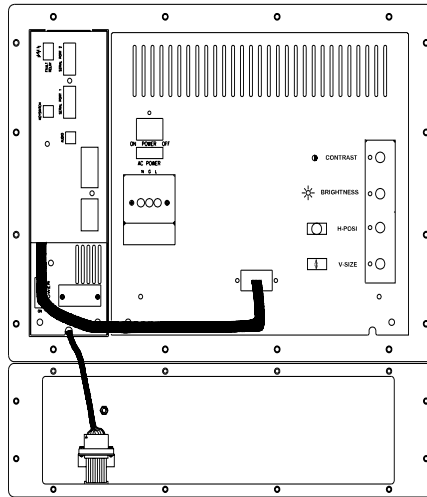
PanelMate 4000 Keypad Unit Rear View
